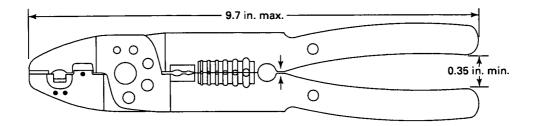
Type II, Class 3, Wire Cutter/Stripper, Large Frame, Strippers Rear of Pivot
